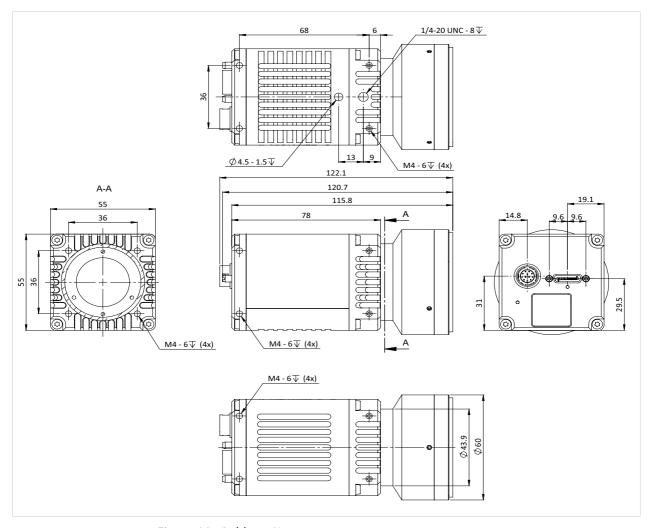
Goldeye CL, dimensions with F-Mount lens adapter
